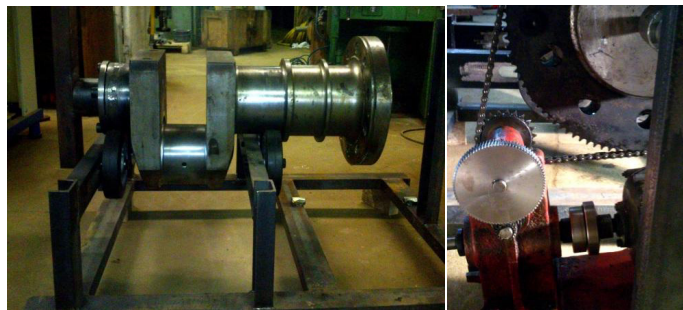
Crankshaft bed frame with gear and chain crankshaft transmission.
